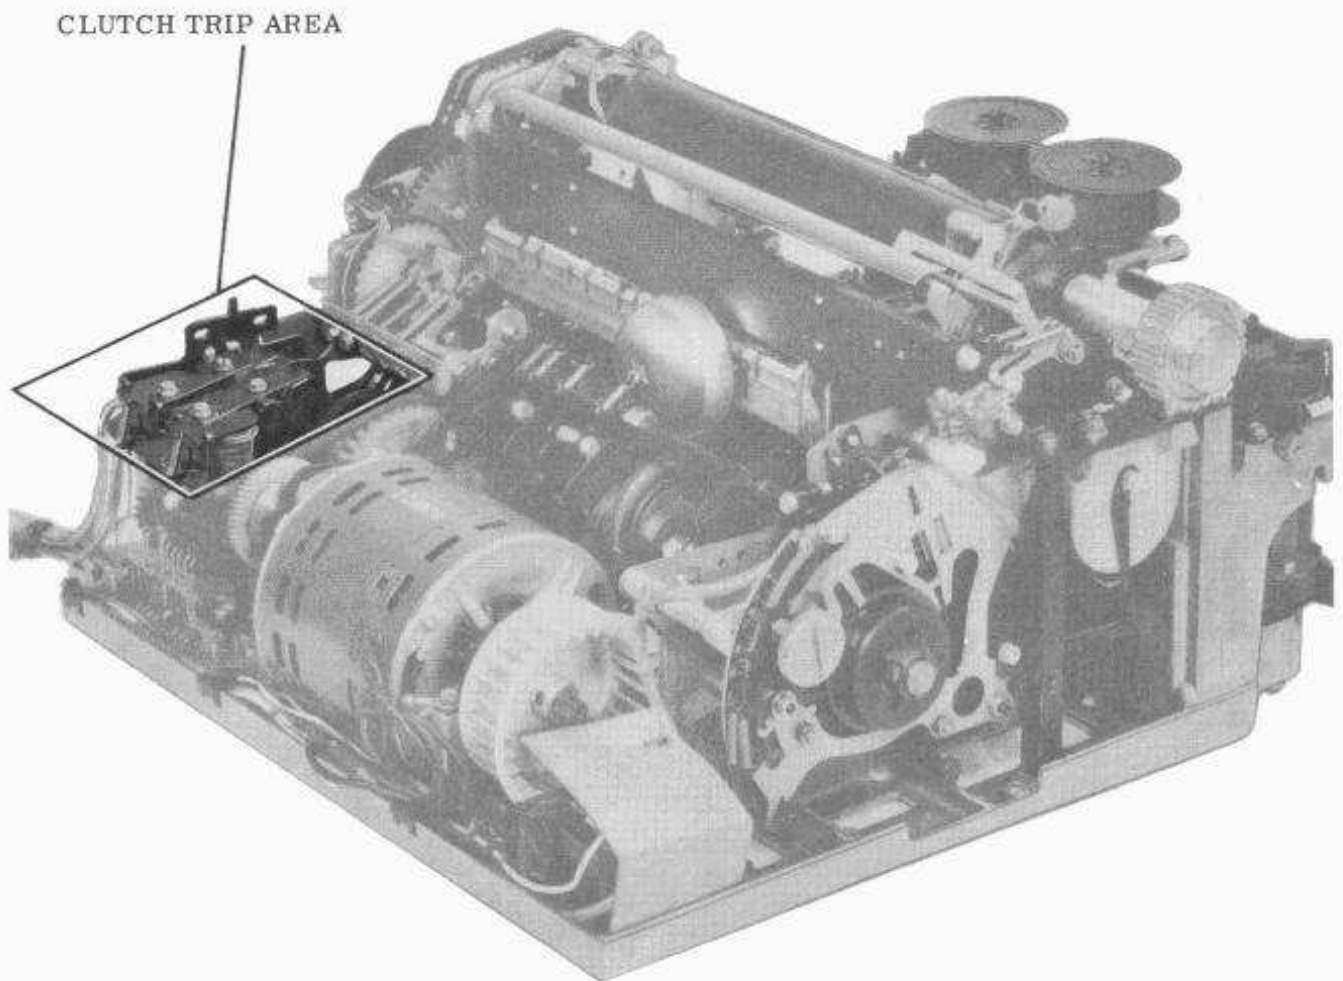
Clutch Trip Area (Without Reader Feed Magnet Contact Assembly)
